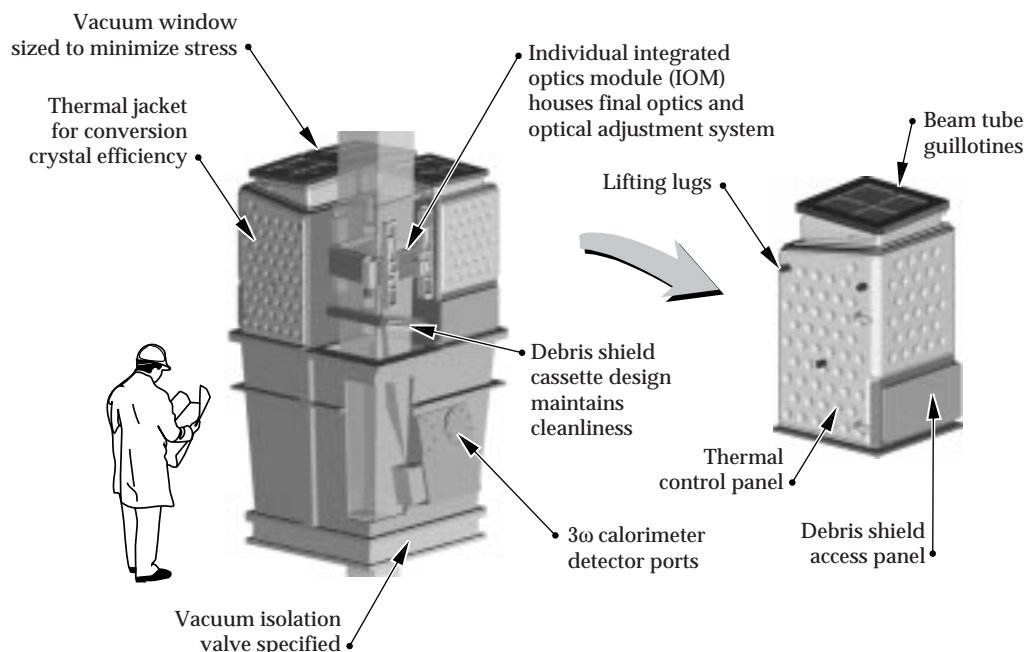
The final optics assembly is an integrated optomechanical design package. (40-00-1097-2269pb01)
